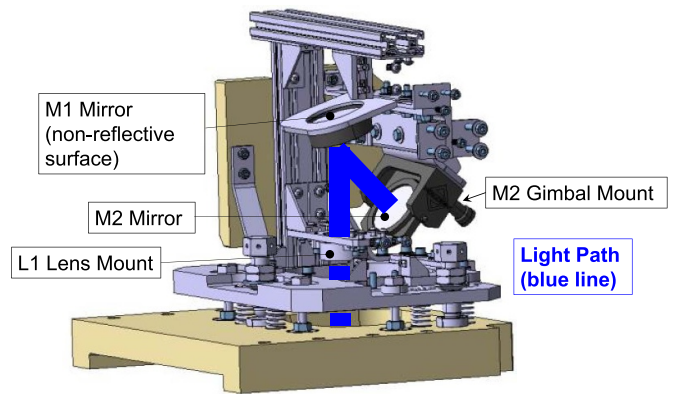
Side view of L1, M1 and M2 including the light path (thick blue line) with one of the side plates removed.
